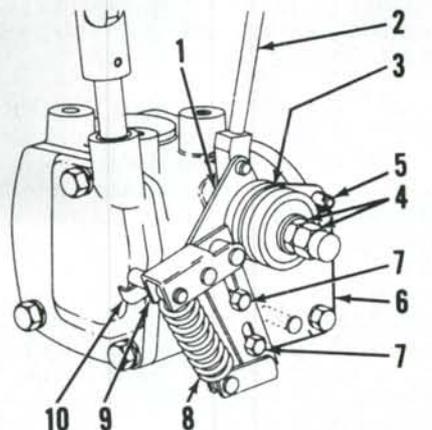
View of control lever linkage friction adjustment and spring carrier adjustment points.
